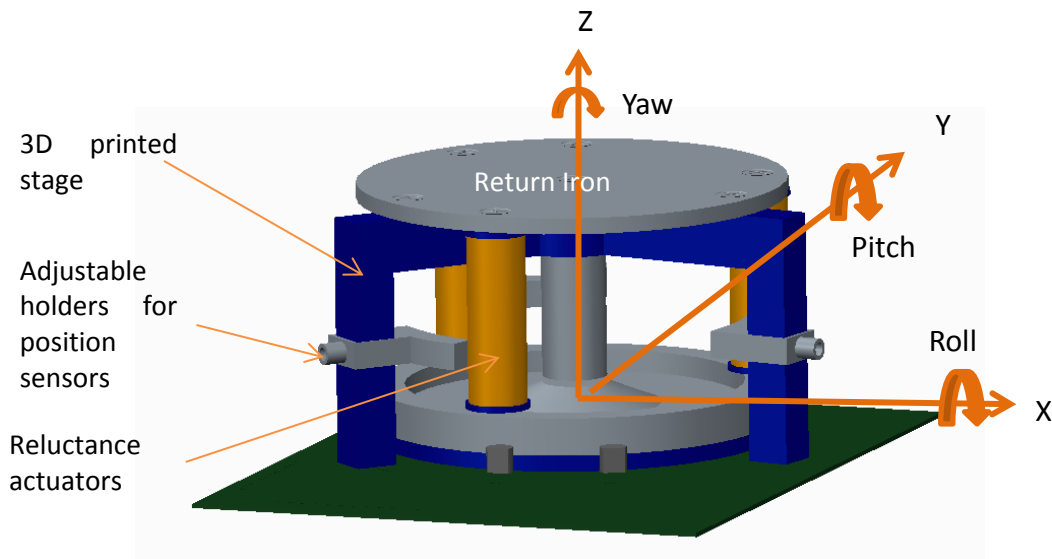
Magnetic bearing for Z, Pitch and Roll axis
